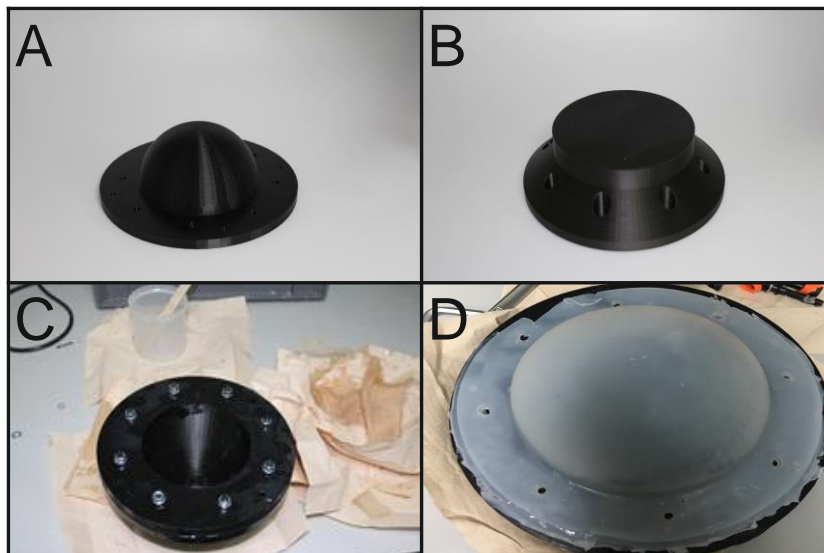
Experimental overview of silicone casting. A-Top Mould, B-Bottom Mould, C- Silicon Curing, D- Demoulded Silicone Scalp
